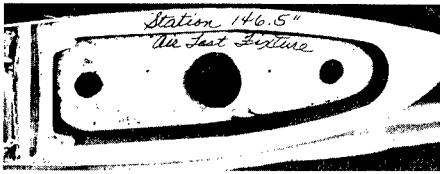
Air test fixture left in blade of OH-58. Fixture was found because of balancing and rattling problems.
